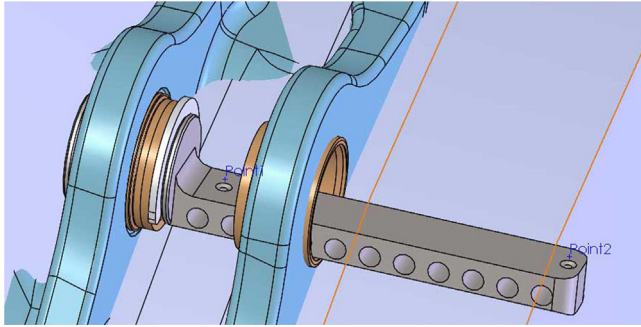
Single sided vector bar design for tail mount datums.
